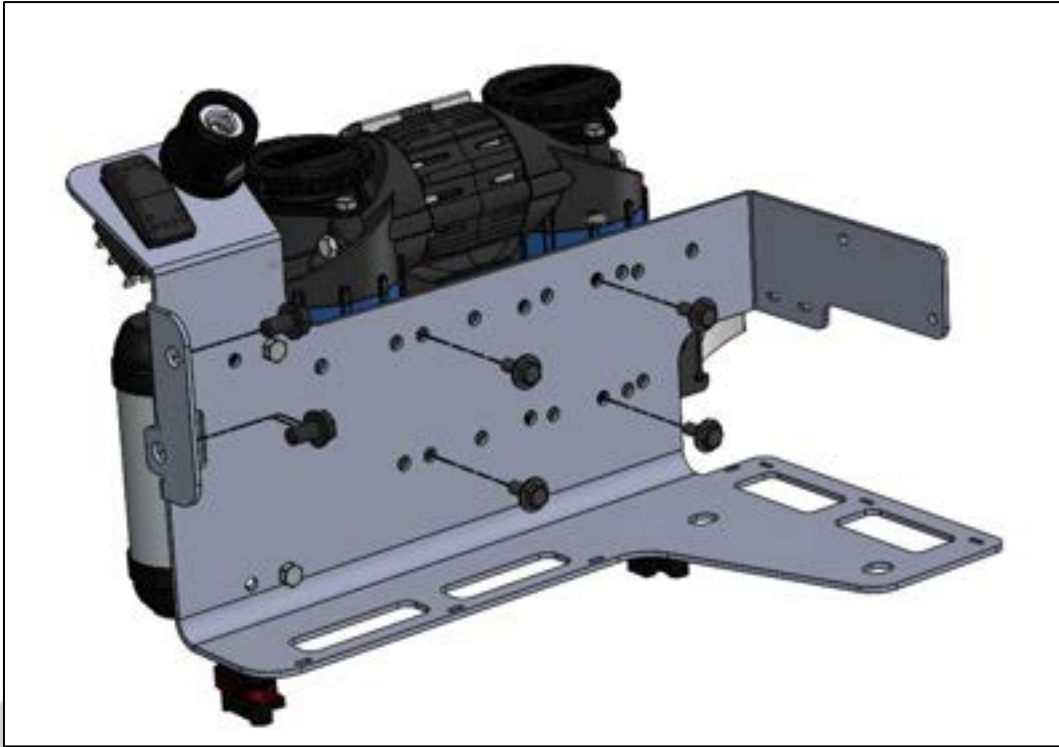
Brushless Twin Compressor bracket pre-assembly front view
